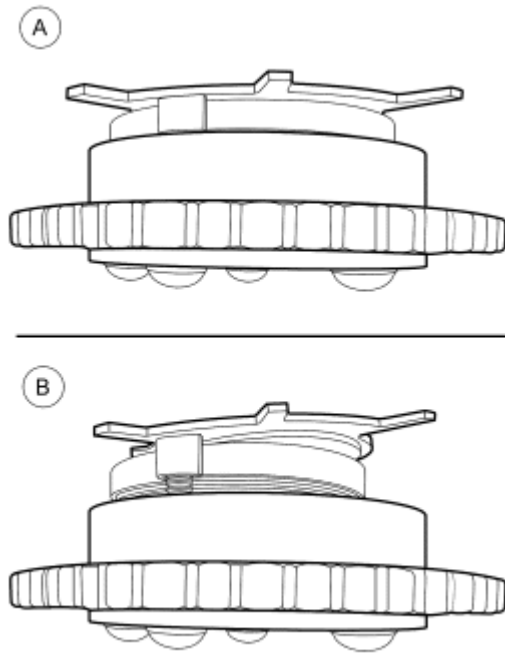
Inspecting Rear Of Camshaft Phase And Sprocket
